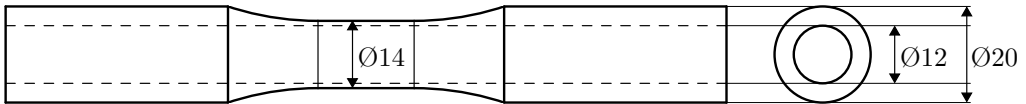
Planned thin walled test bars (dimensions in mm).
